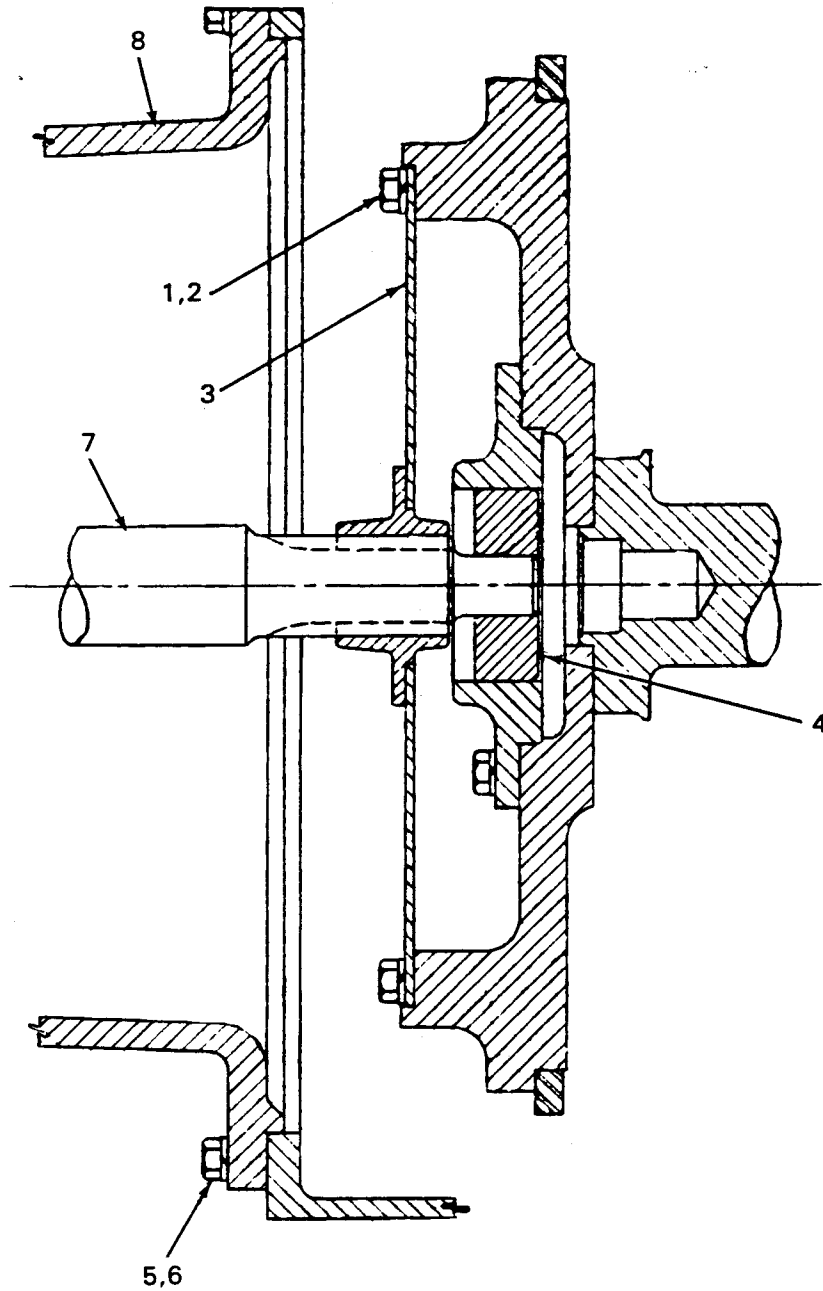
Pump Model 64B2-F300 LPG Drive Assembly
